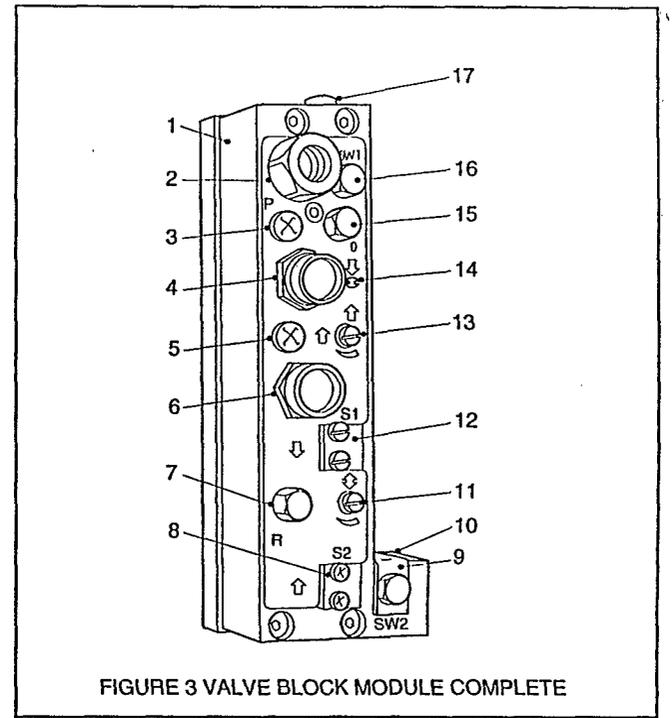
VALVE BLOCK MODULE COMPLETE
